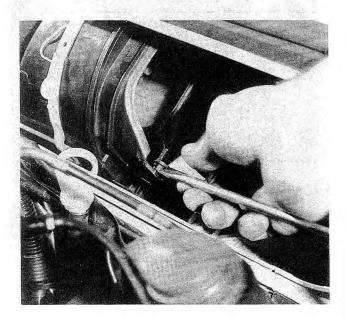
Air recirculation flap being disengaged from blower motor housing. Disengage both sides.
